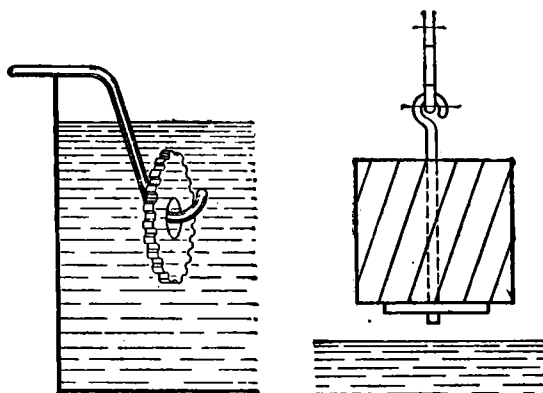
Quenching fixtures for milling cutters and other tools having holes.
